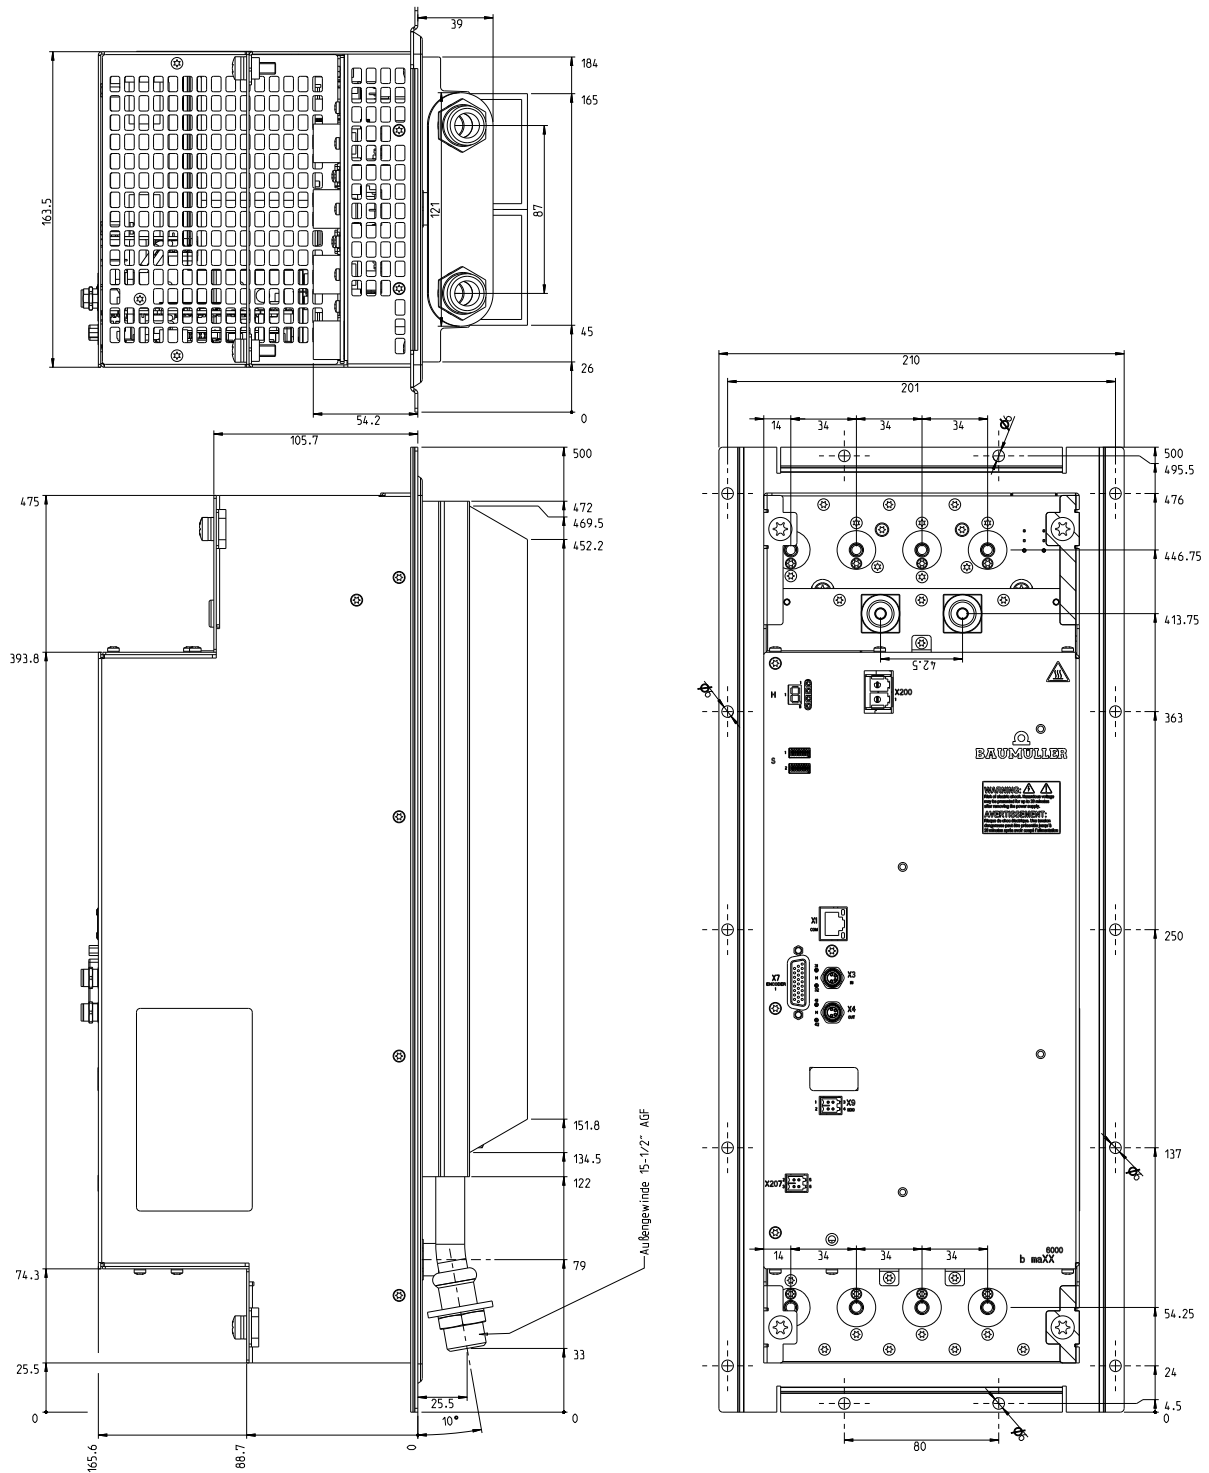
Dimensions BM654X/BM65DX-FXXX00
